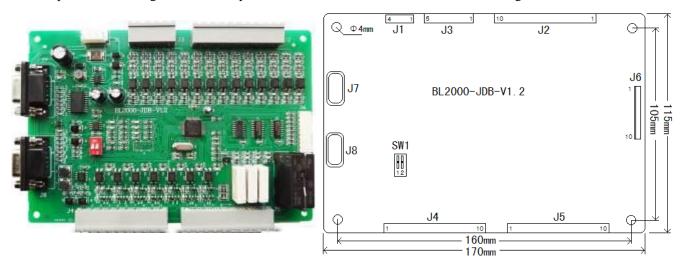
CALL TOP BOARD BL2000-JDB-V1.2 SHAPE & DIMENSION
